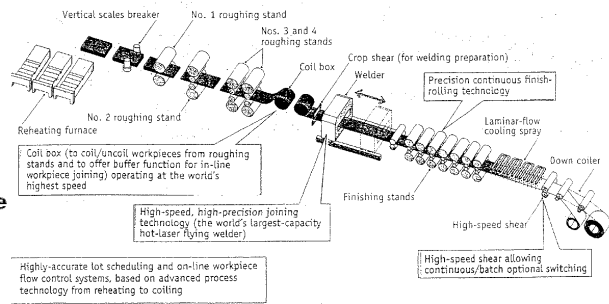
Laser welding of heavy hot slab (Nippon Steel Corp)
